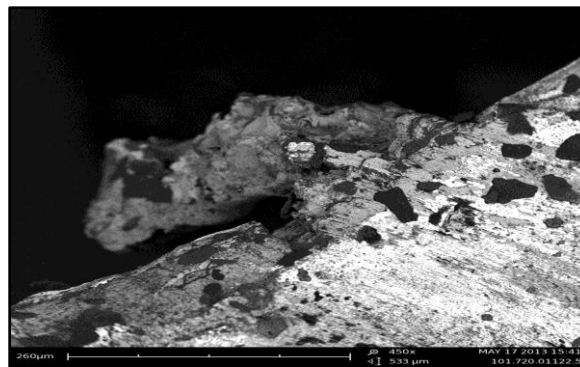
SEM shows the Build Up Edge (BUE) on tool edge
